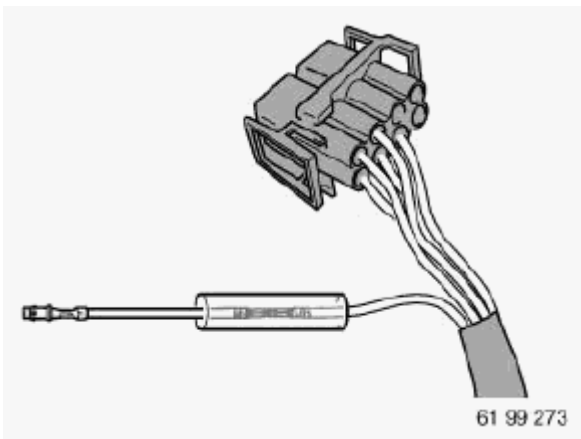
Identifying Shrink-On Sleeve Over Butt Connector
